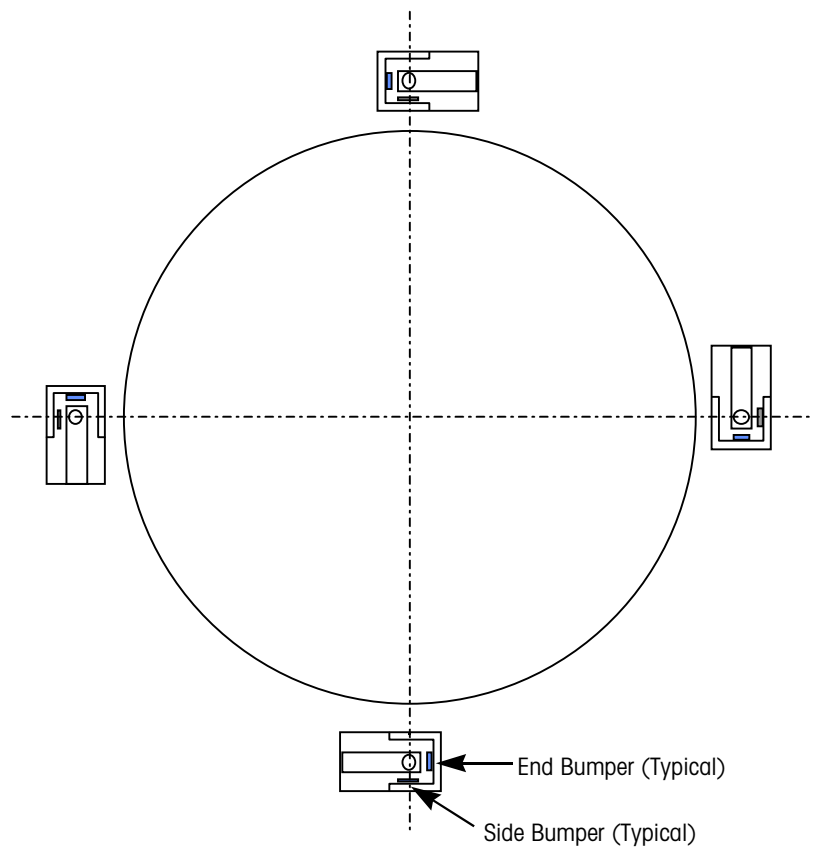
Plan View of Circular Mounting Arrangement for Model 0958 Centerlign Modules
